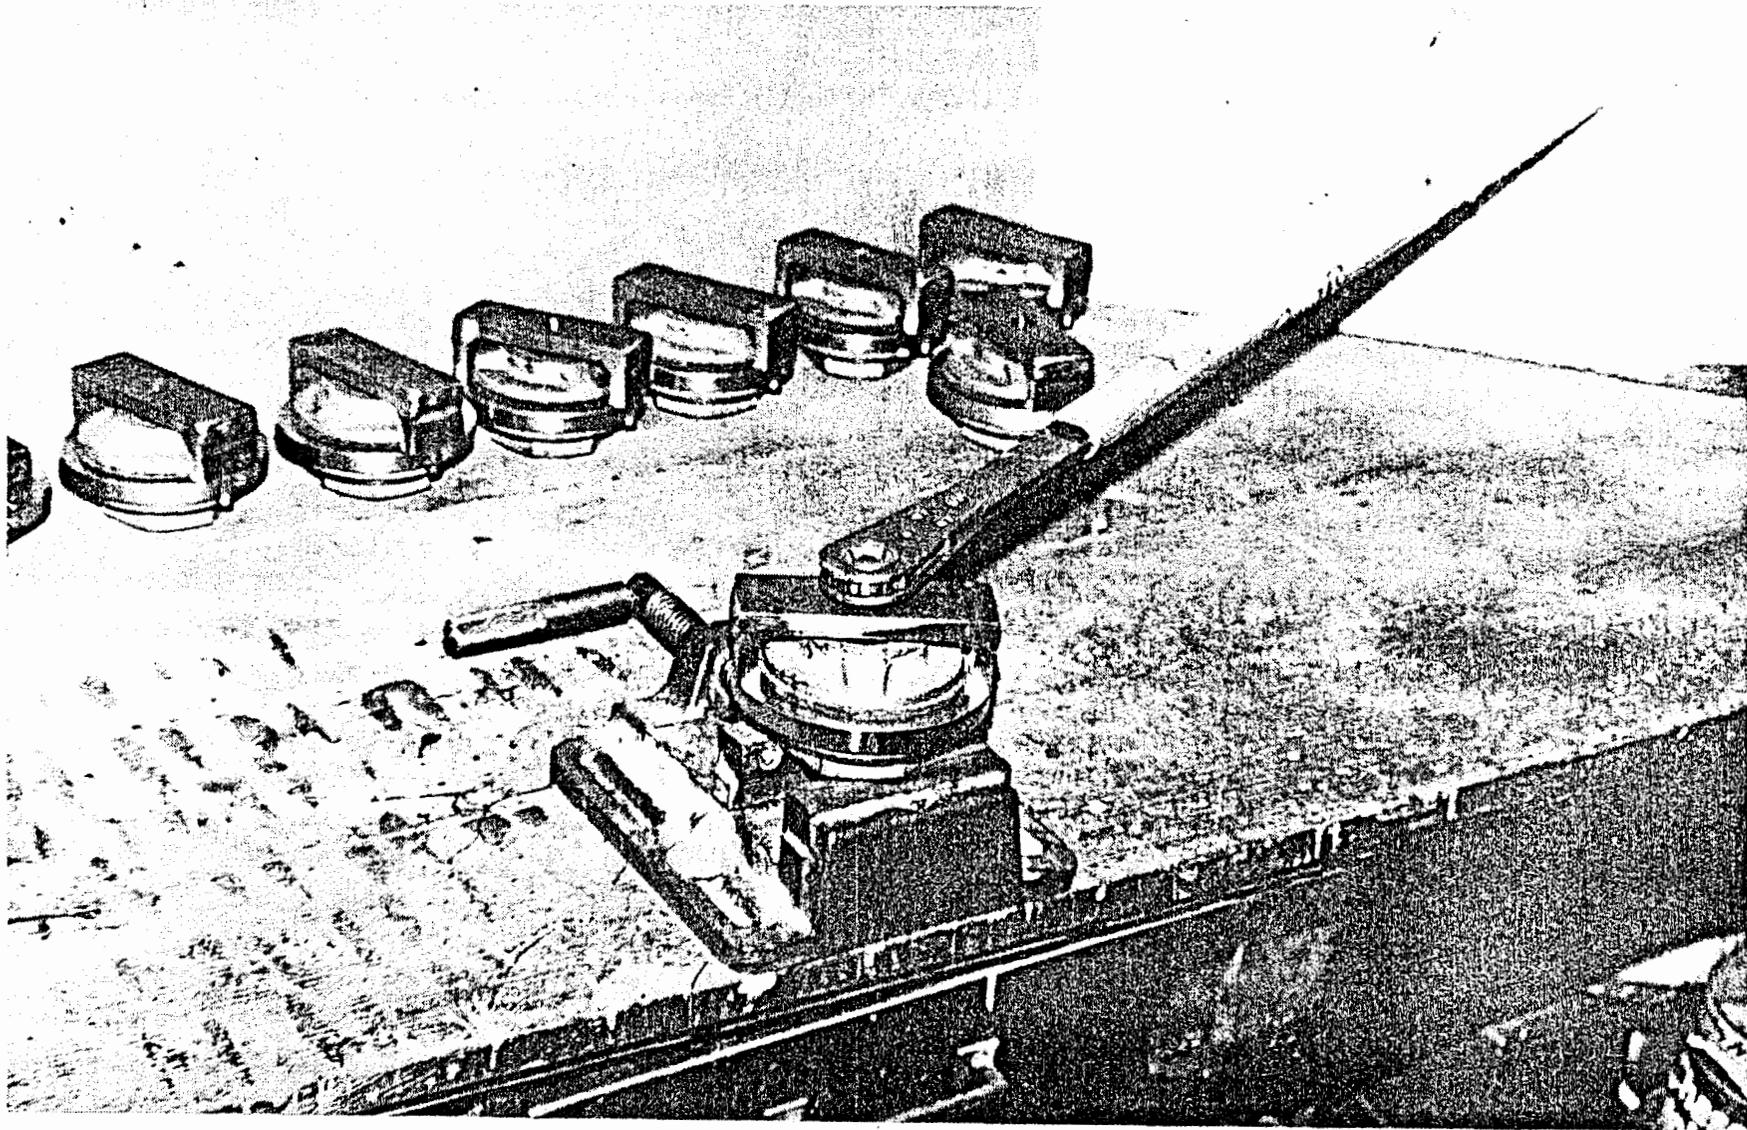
CLTD Manufacture, Running-In Modified Torque Limiter.
